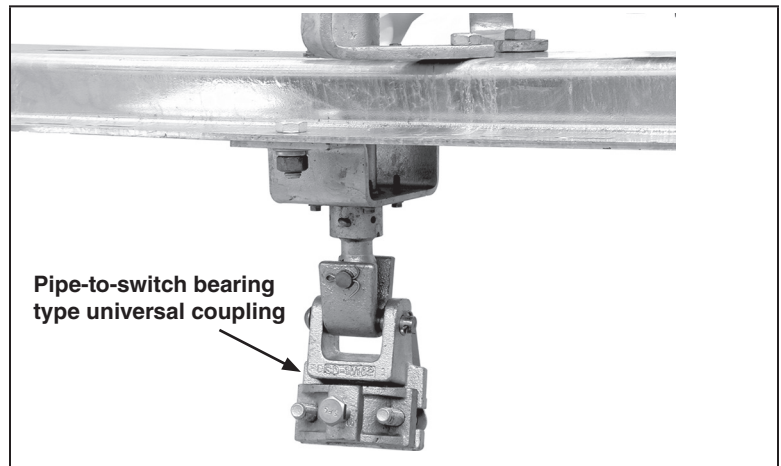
For switches directly connected to the vertical operating pipe, attach a universal coupling to the switch pole rotating shaft.
